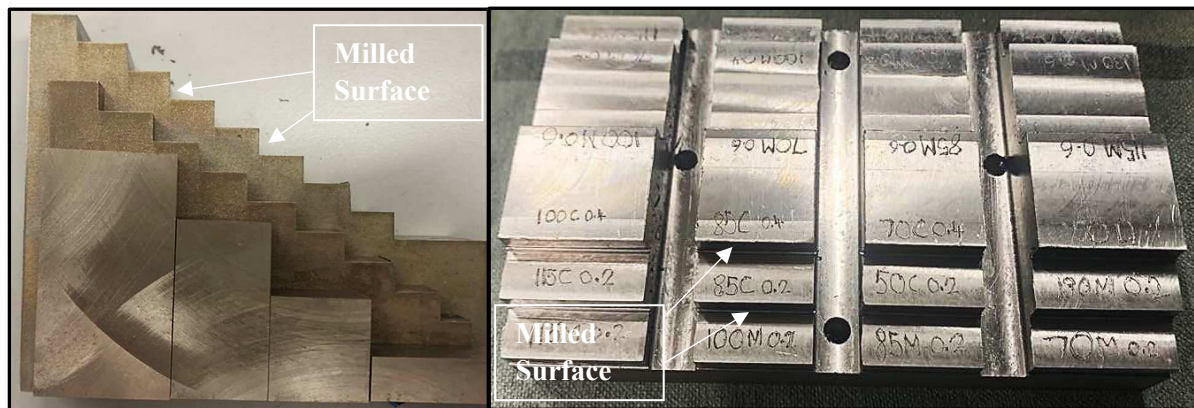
Images of the stepped workpiece geometry used to measure surface roughness (pre and post sectioning).
